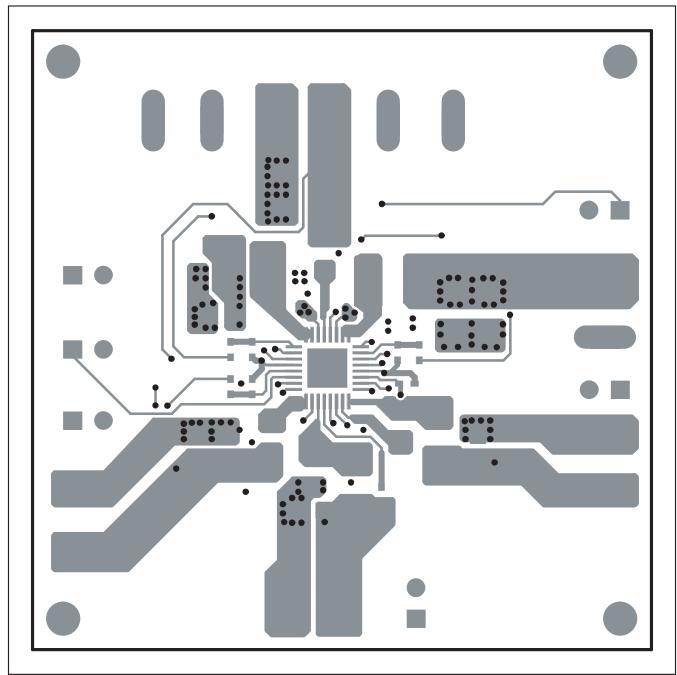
MAX8858 EV Kit PCB Layout—Top Layer
